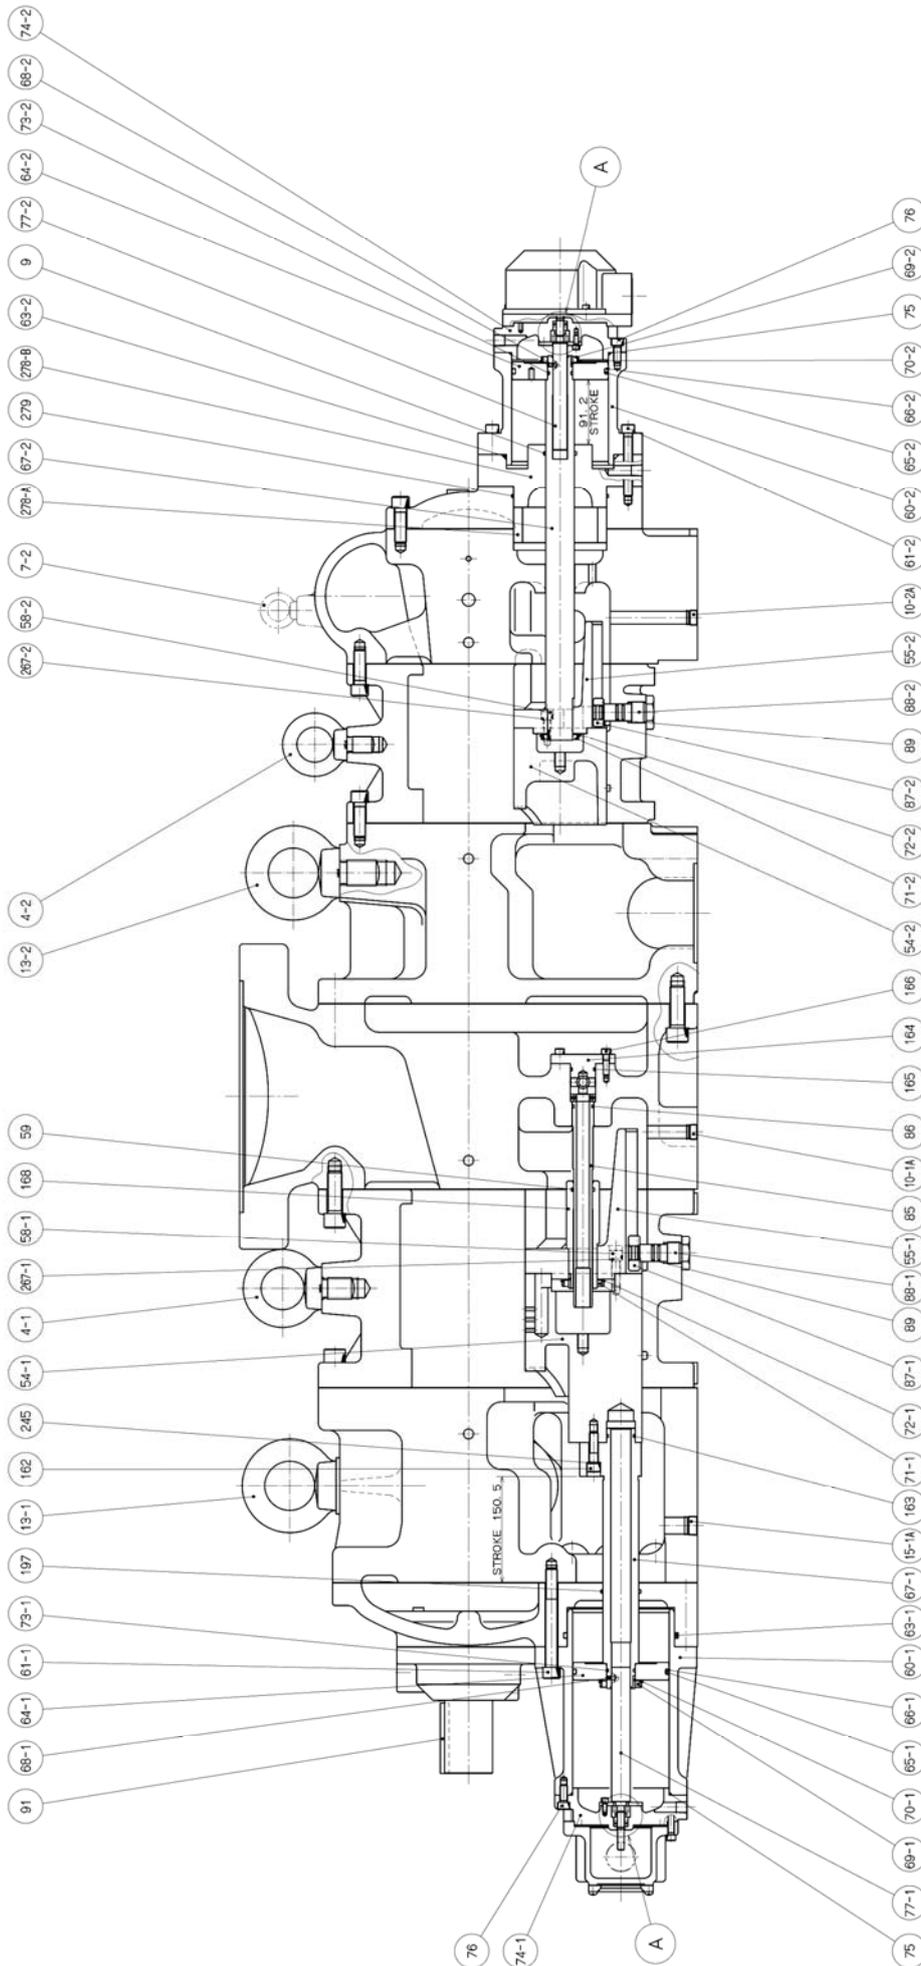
2520SSC Assembly Sectional View (Vertical)
